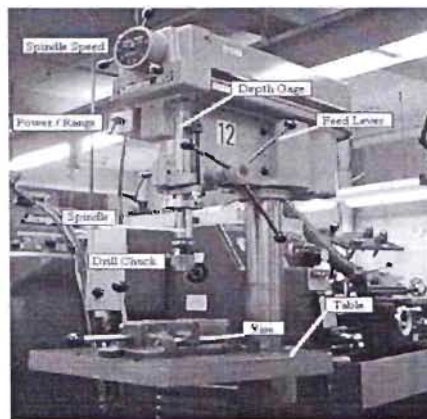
Drill machine (www.cuttingtoolssite.com)
